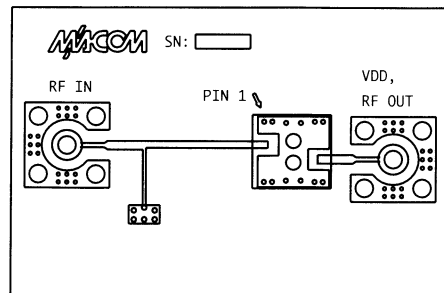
FR4 PCB Sample Board Layout for AM50-0002
